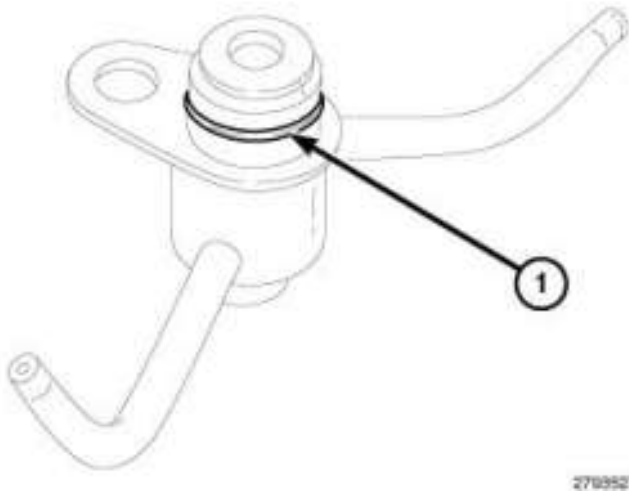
Piston Oil Cooler Jet O-Ring Seal
